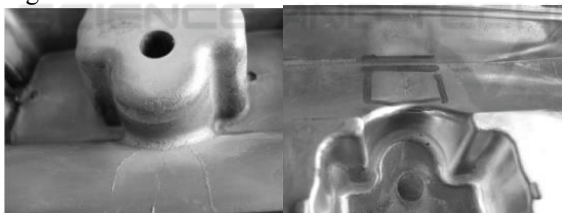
Thermal fatigue crack of the hot work mold surface.
